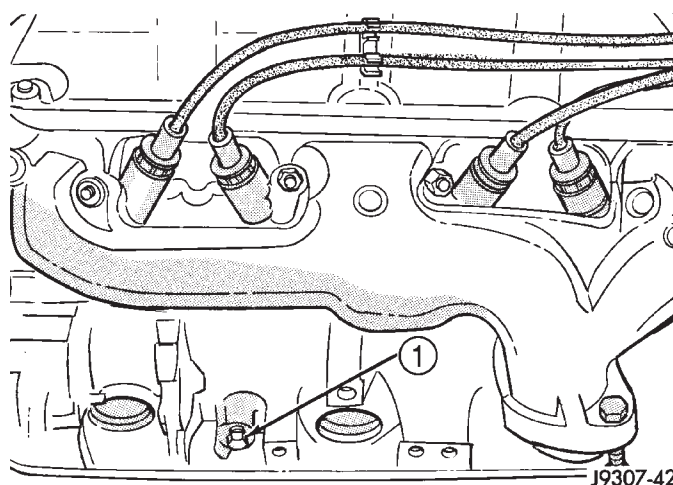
Cylinder Block Drain Plug—3.9L/5.9L Engines—Typical
